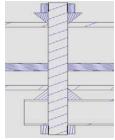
Cross section of the generating adjustable Coulomb friction mechanism
